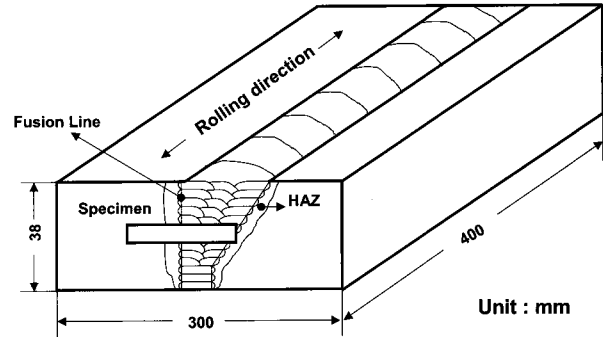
Extraction of specimen from the multi-pass welded block
